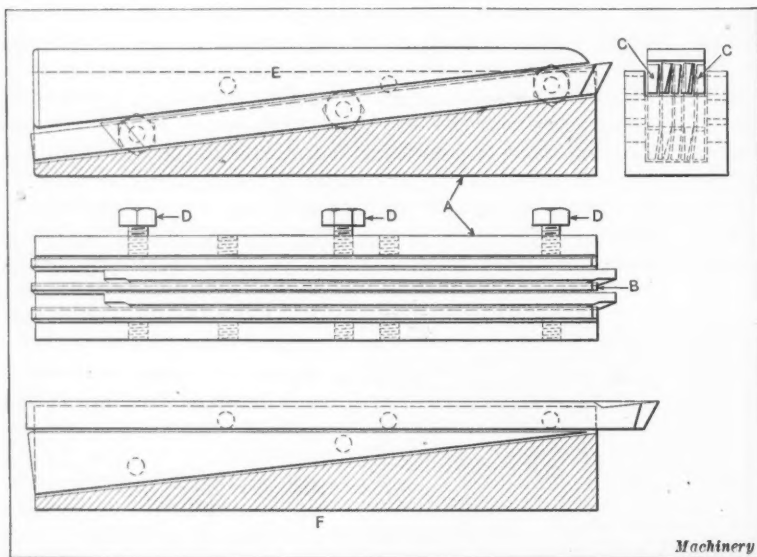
Multiple Tool for cutting Both Grooves of Double Thread simultaneously
